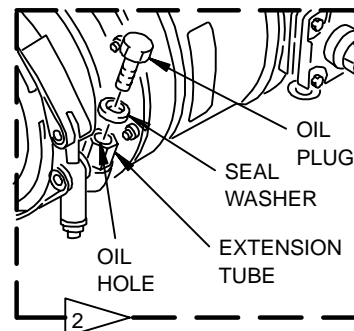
APU STARTER MOTOR CLUTCH HOUSING - OIL REPLENISHING
